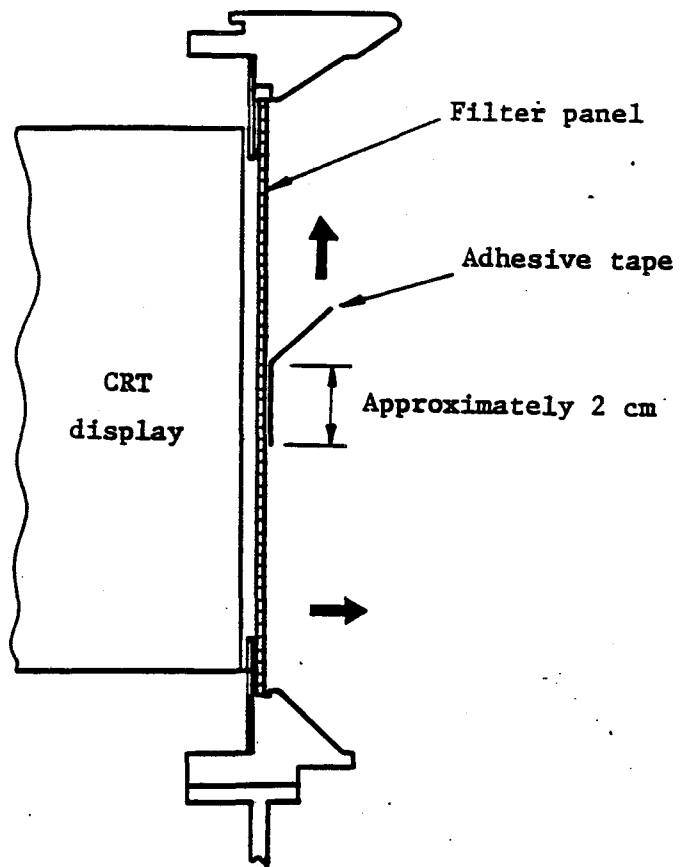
Filter panel removing procedure (cross-sectional view)
